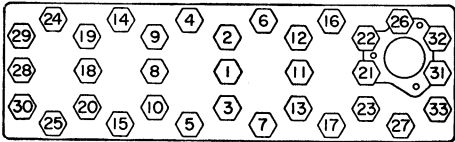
Cylinder head tightening sequence. Six-cylinder engines with 33-bolt head
